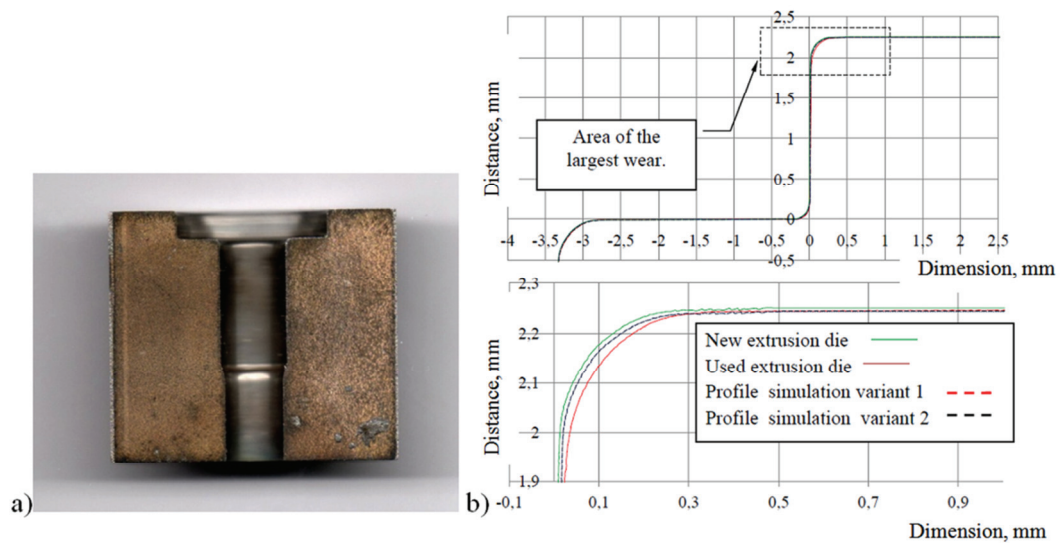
a) Photograph of the finish forming die, b) profiles of new and used after production of 650000 pieces finish forming die at the area of the largest wear.
